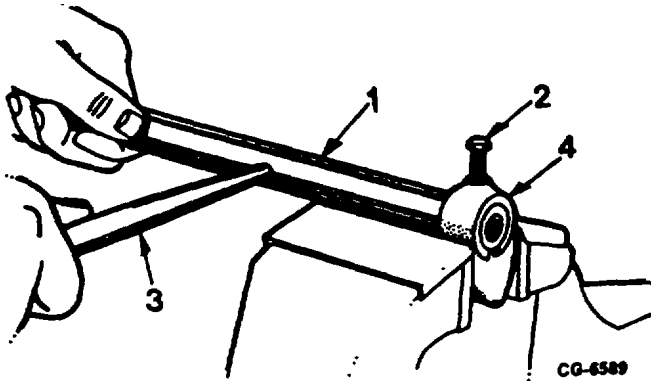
Turning Rocker Arm Shaft to Align Screw Holes
